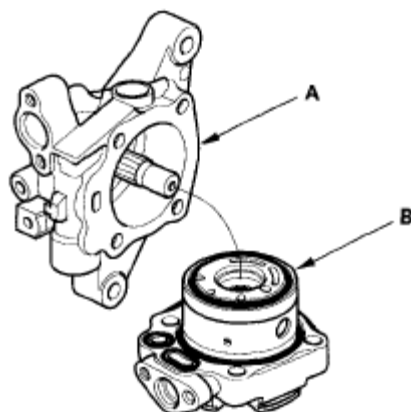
Identifying Align Roll Pin Set Hole With Roll Pin
